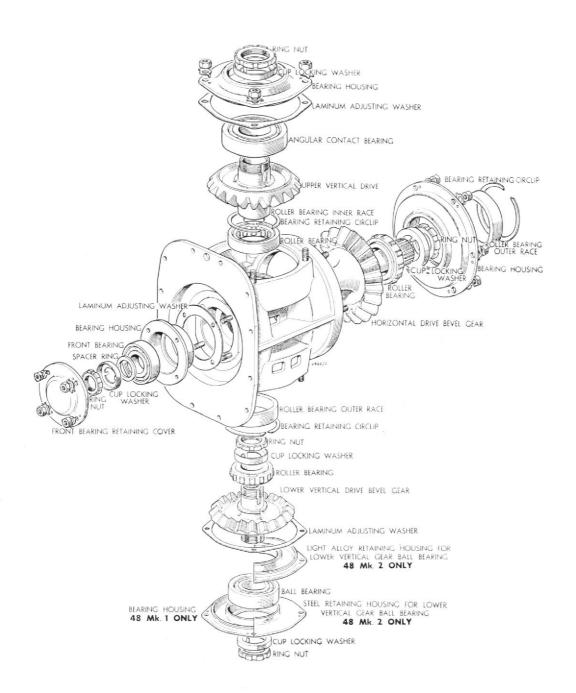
Exploded view of centre housing assembly. The components which are annotated to show that they are peculiar to the 48 Mk. 1 or 48 Mk. 2, are normally symmetrical in shape, but in order to clarify the difference in these particular components they are shown as half-sections in this illustration.
